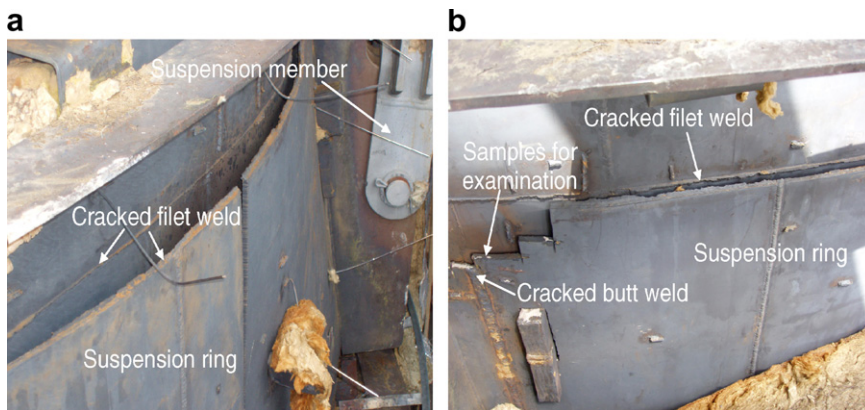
View of the cracked welded joints connecting the suspension ring with the mixing chamber shell.
